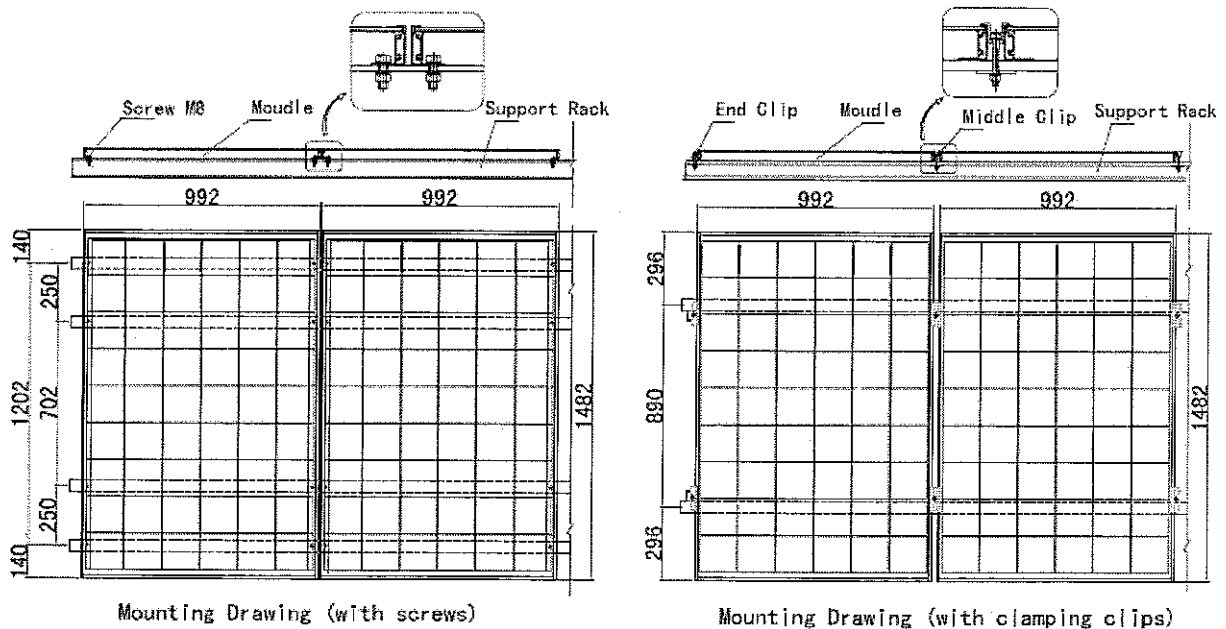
Mounting Drawing for 6*12-125x125mm 72cell SPV Module (with clamping clips and screws)
